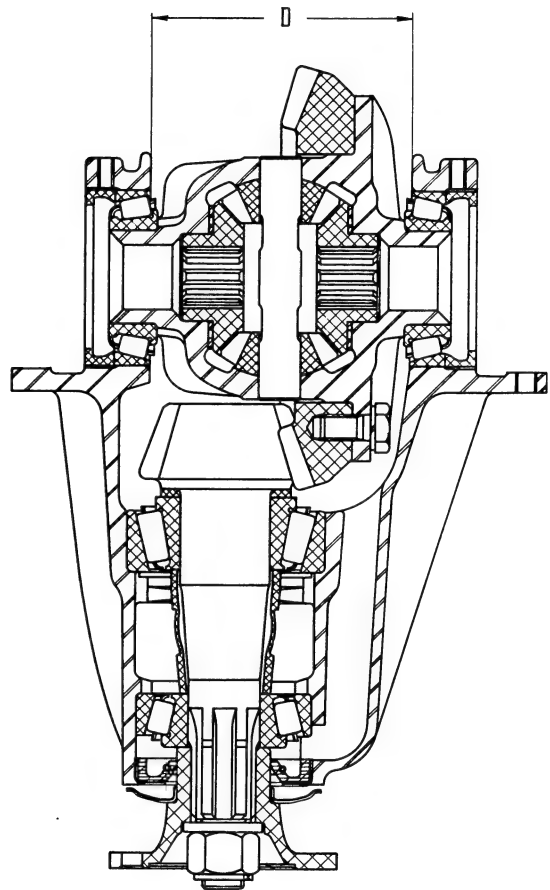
Differential case roller bearing preload inspection diagram.
